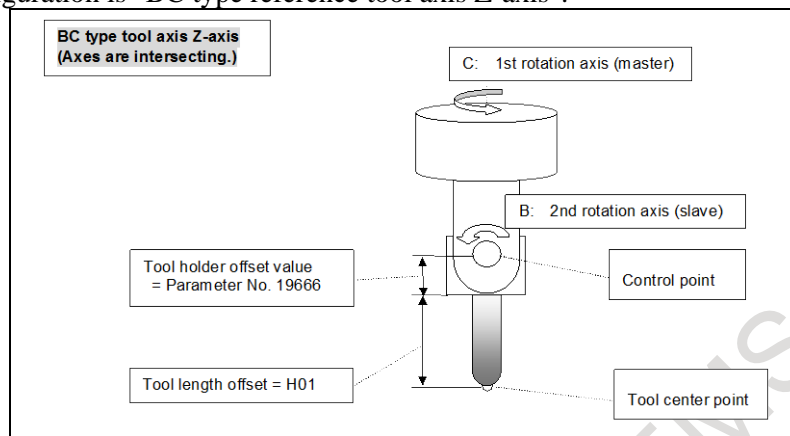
(i) Example of operation on a machine of tool rotation type
